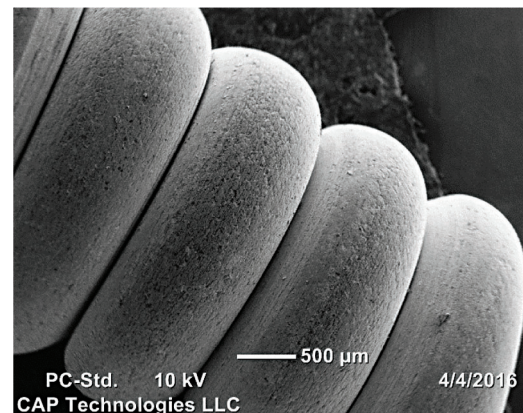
Silver-coated stainless steel wire after wrap testing—no flaking.
